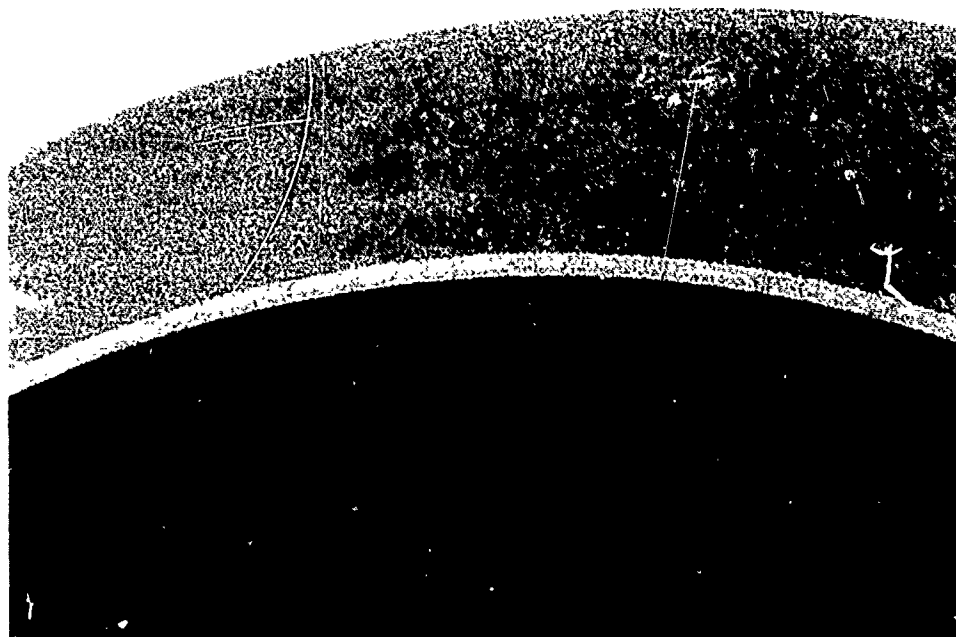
Close-up view of the chamfered inside edge of a spherical sector specimen showing a precise nickfree surface. Small nicks or chips can be smoothed out with a stone or Cratex abrasive elastomeric file.
